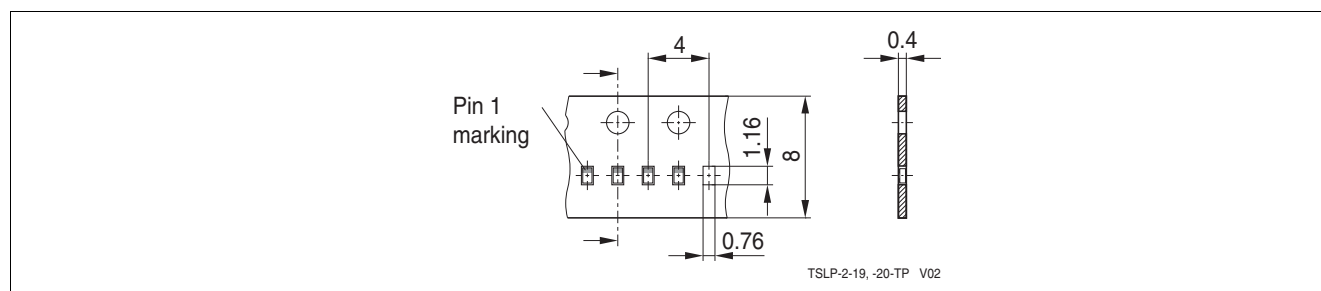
TSLP-2-20 Packing (dimension in mm)
